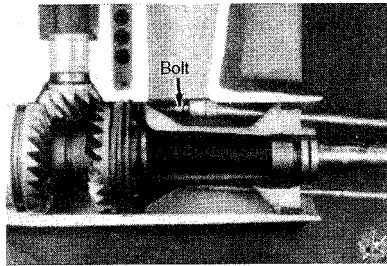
To remove the bearing carrier, remove the four 318" bolts located inside housing (models with 4 bolt bearing carrier)...
